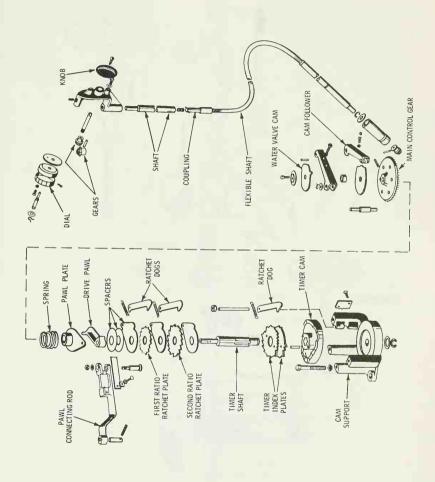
The operating-control and timer assemblies of a typical automatic washing machine.
